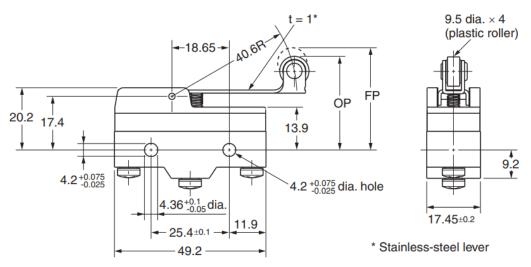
Mechanical Drawing of Z-15GM2-B (Dimensions in mm) [35]
